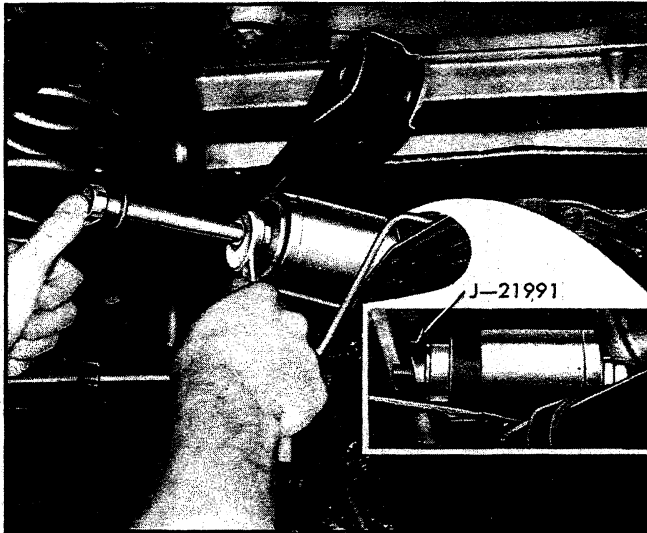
Carrier Mounted Suspension Bushing Removal (Heavy-Duty) (Chevelle)
